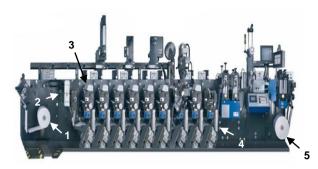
Roll to roll hybrid printing machine: unwinder (1), corona surface treatment (2), rotary screen printing unit (3), hot air drier (4), winding unit (5).
